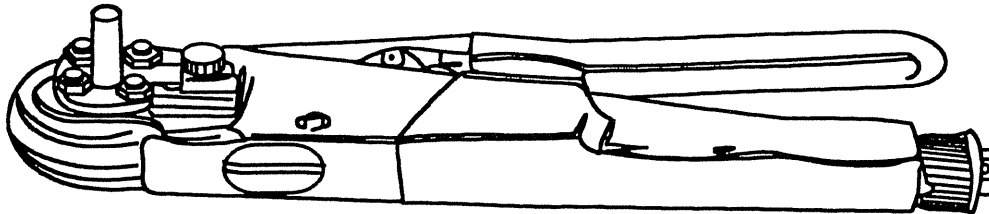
CRIMP TOOL WITH POSITIONER
